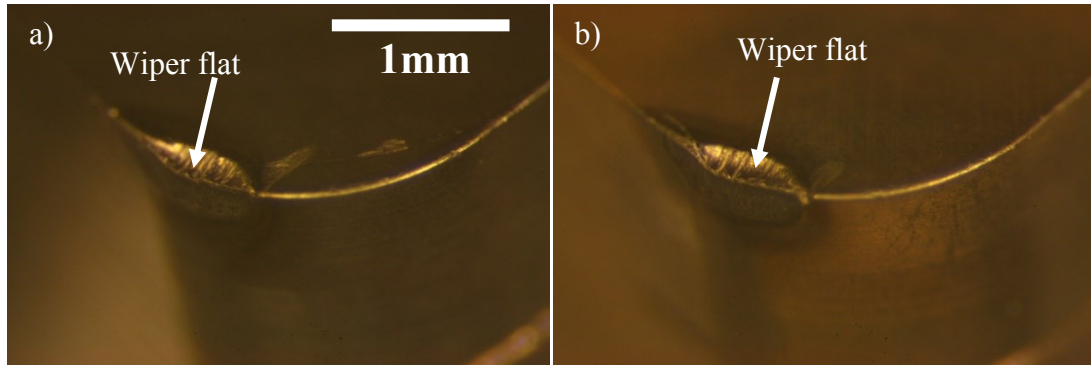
Optical micrographs of (a) Test 20 and (b) Test 23 at the end of tool life
